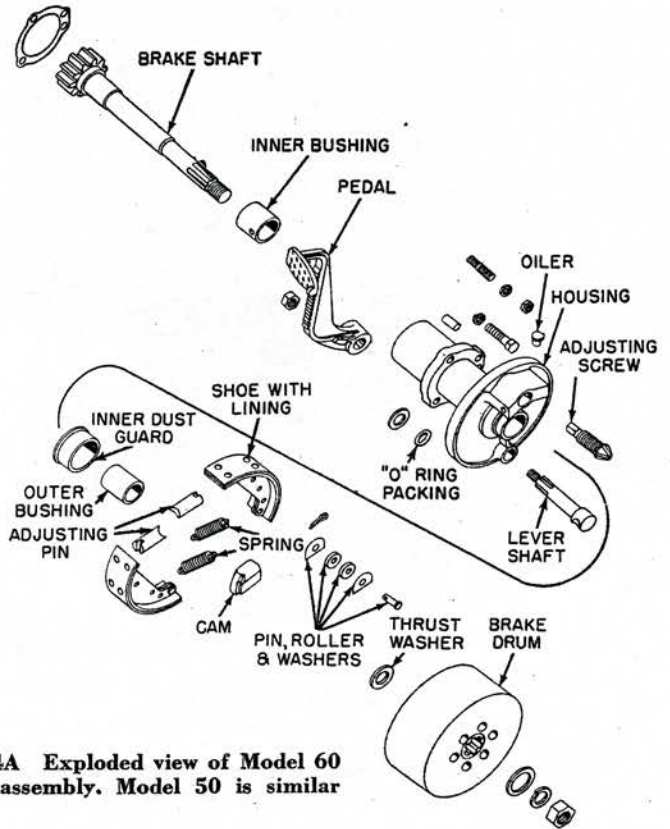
A Exploded view of Model 60 brake assembly. Model 50 is similar
